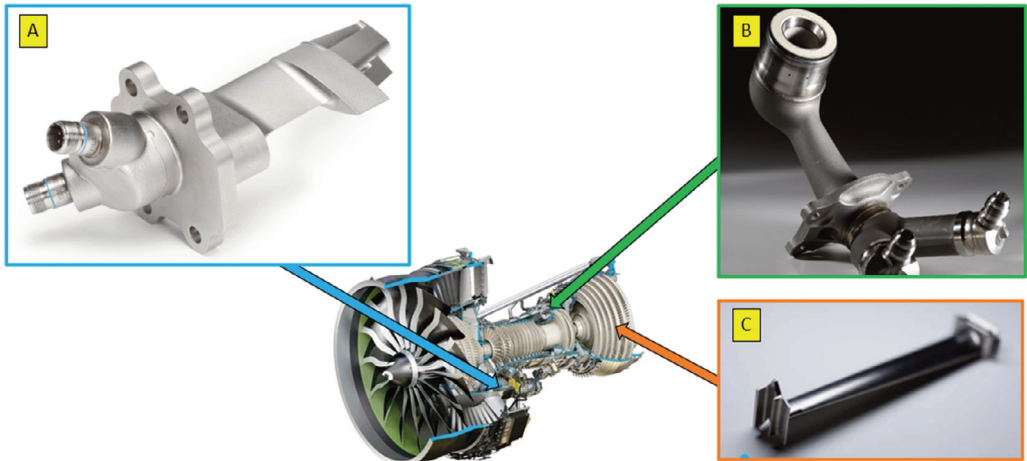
Additive manufactured GE9X engine components: (A) T25 sensor housing; (B) fuel nozzle tip; and (C) low-pressure turbine blades (adopted from reference [1]).
